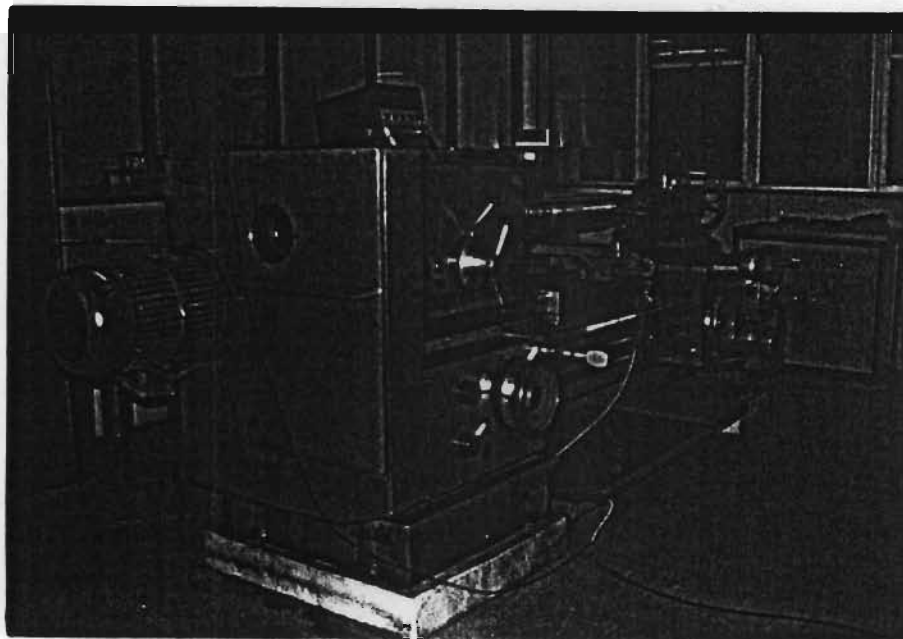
[a] Experimental Lathe with Strain gauge indicator mounted on top.
